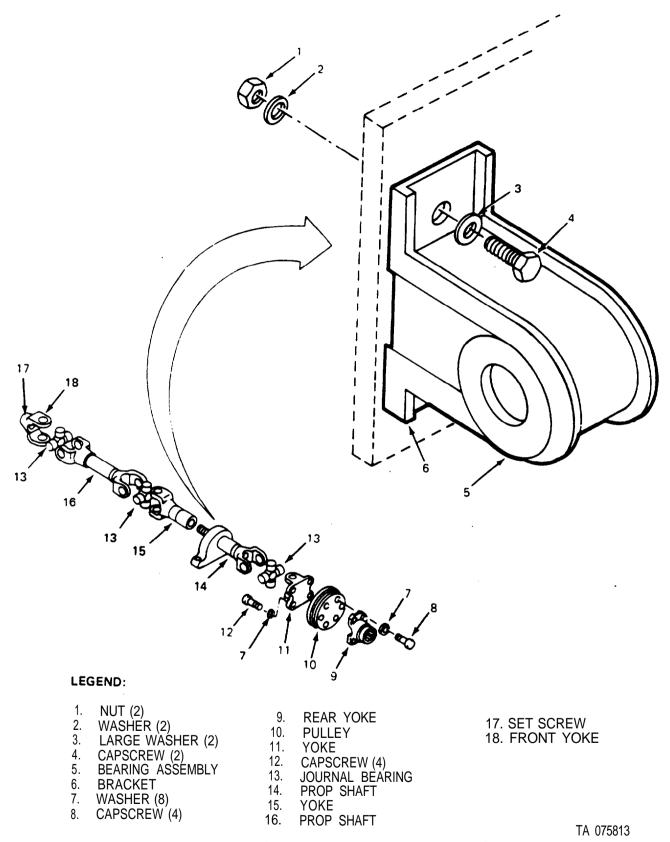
Remove/Install Hydraulic Pump Propeller Shaft.
